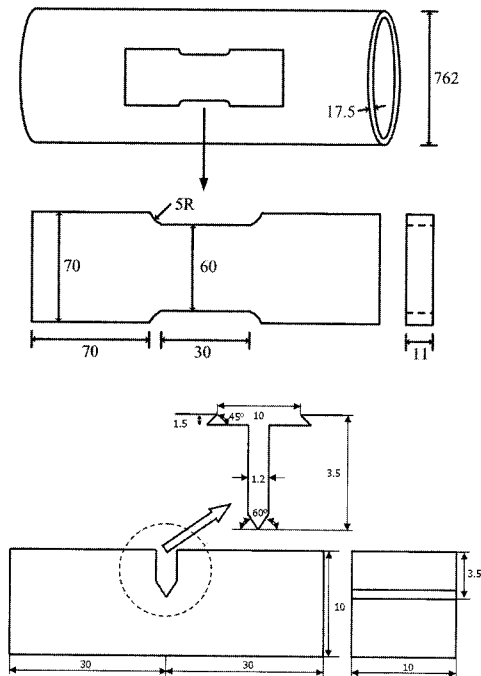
Plate-type tensile specimen for pre-strain and 3-point bend specimen for the CTOD test
